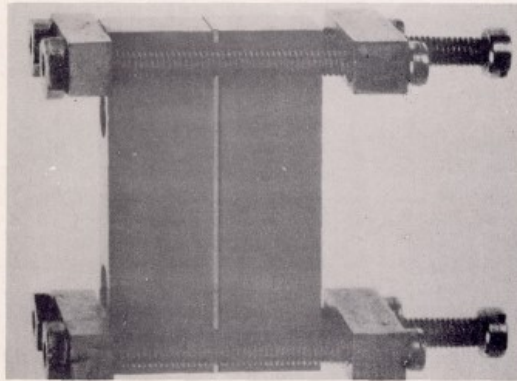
Improvised solid brass guide fixture for compressive tests of thin sheet metal.
